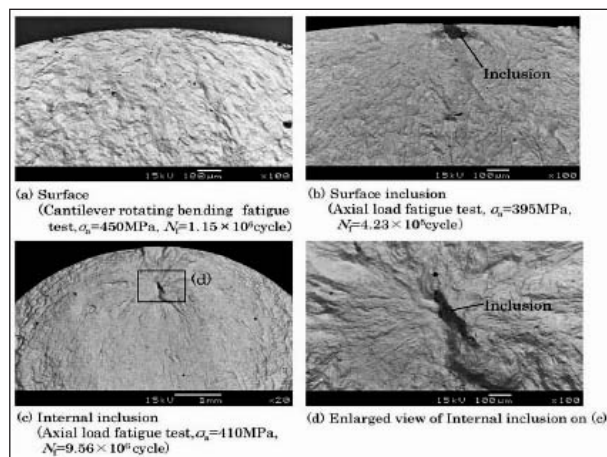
Examples of fatigue crack initiation sites [25].
